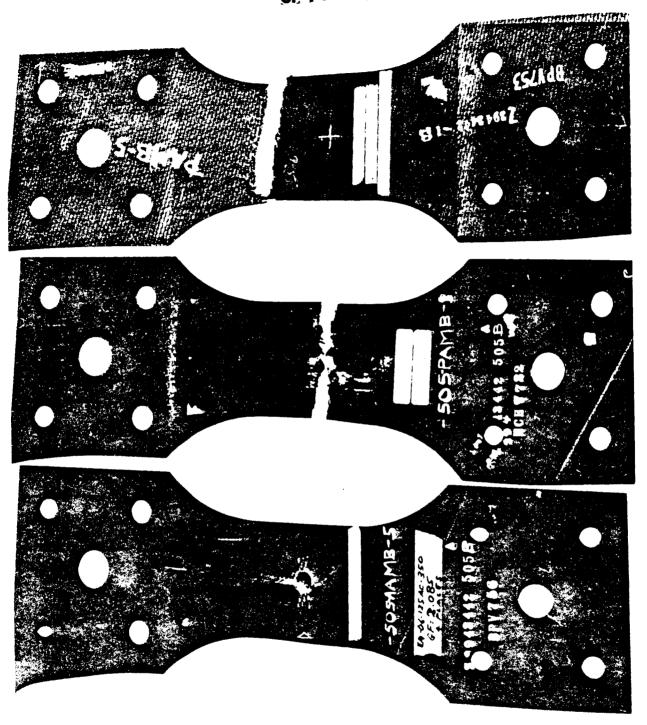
TYPICAL FAILURE MODES OF DAMAGE AND DEBOND SPECIMENS
